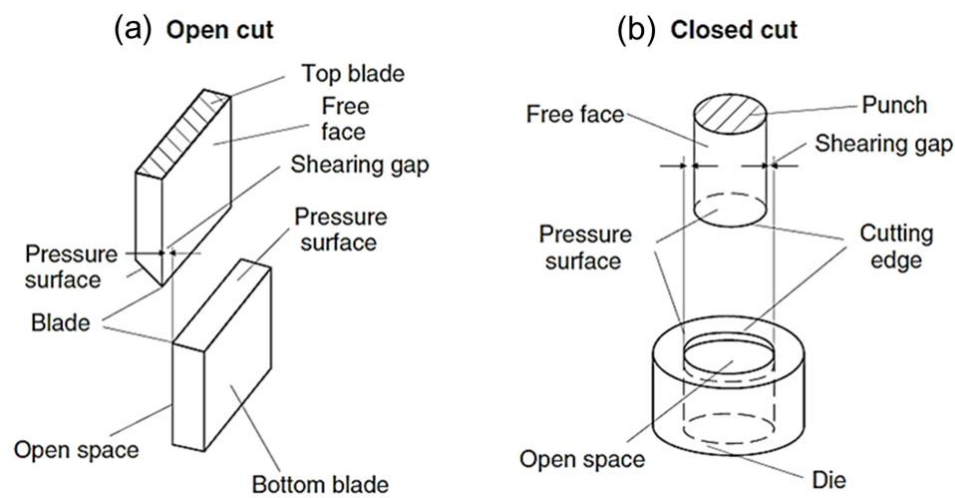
(a) Open and (b) closed cuts in shearing [21].
